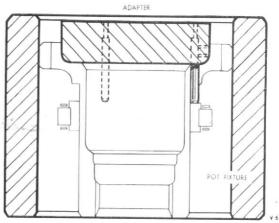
Pot fixture T.77740 and adapter T.77742 for pressing the inner roller race off the upper driving gear.
